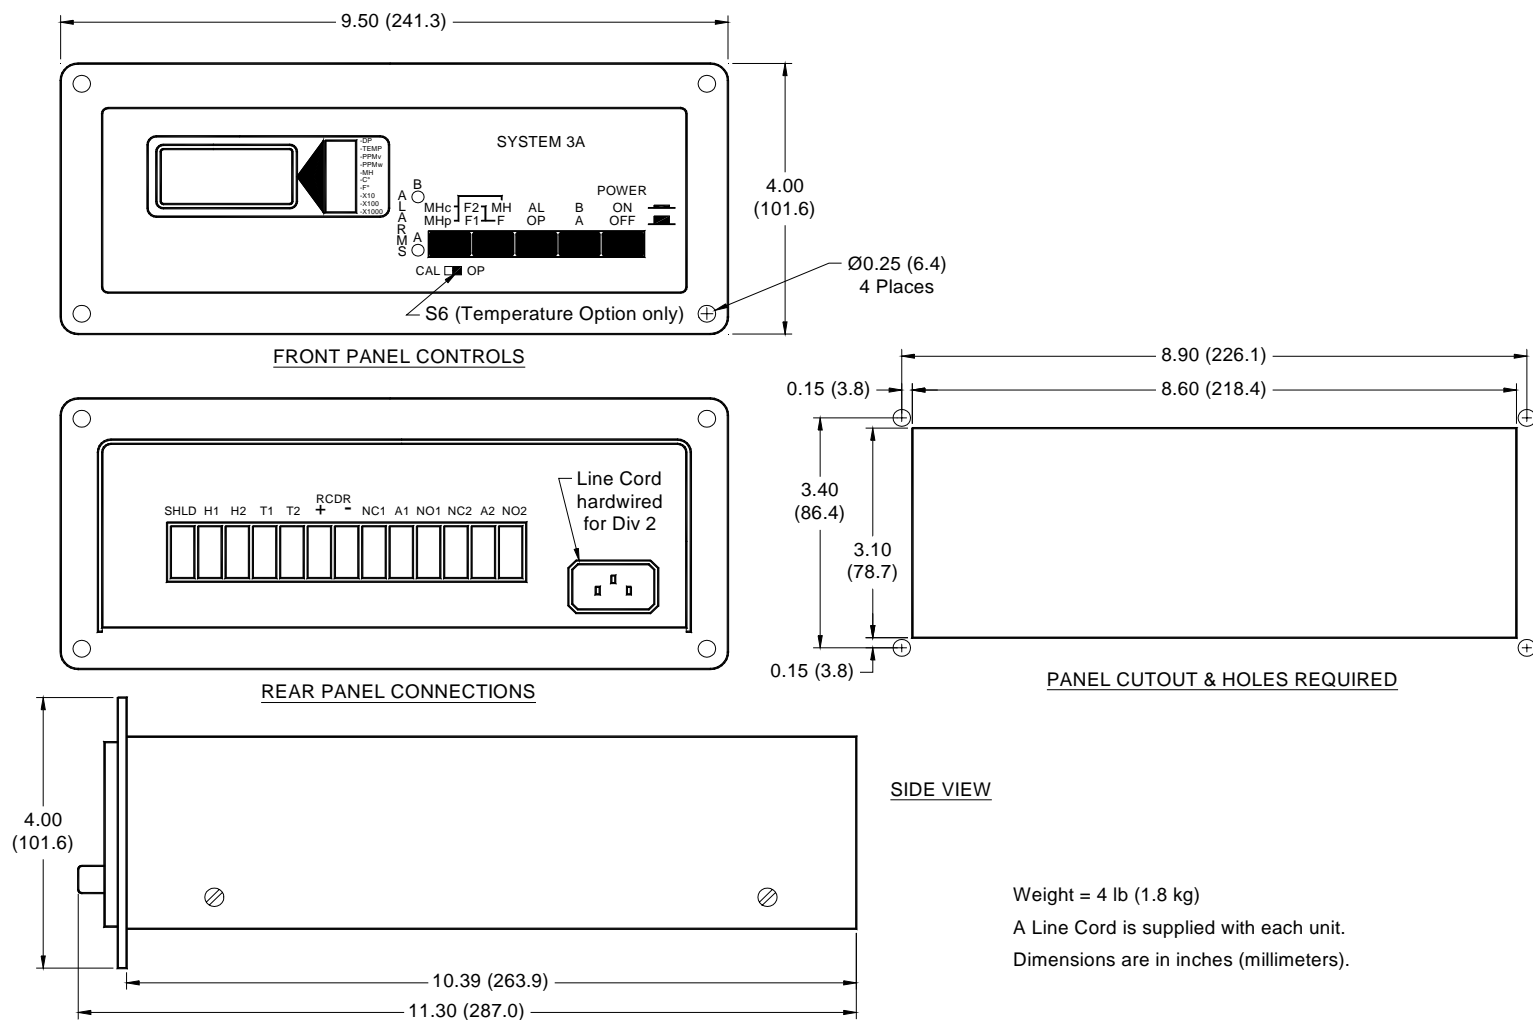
Outline and Mounting Dimensions - Rack Mount Version
